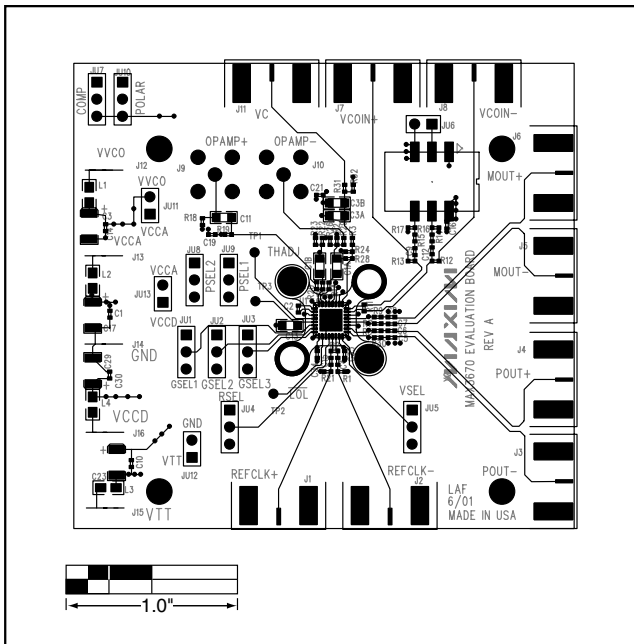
MAX3670 EV Kit PC Board Layout—Component Side
